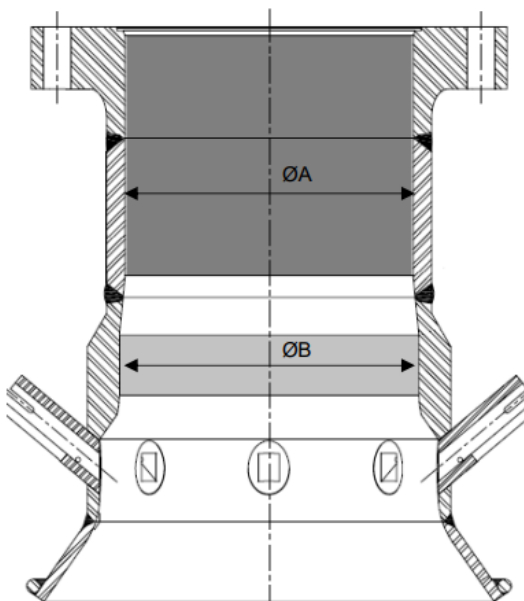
BSDL-SI 's inner diameter to be inspected with the Dimensional Gauge
